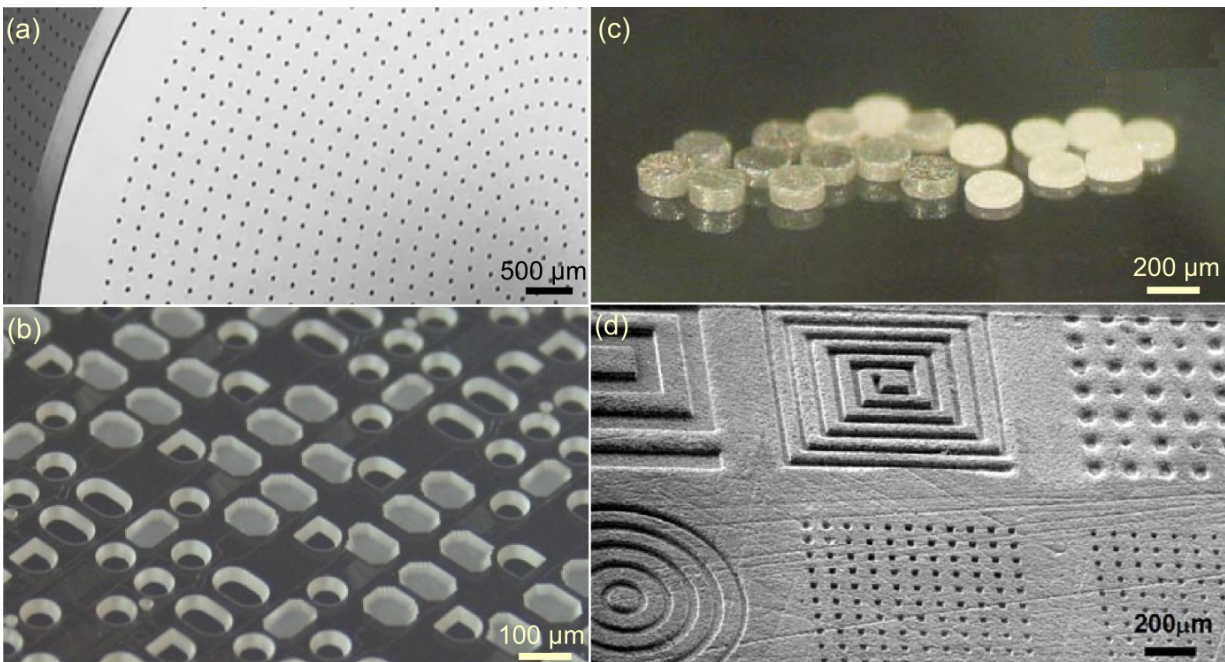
Machined features in ceramics and glass using conventional μ USM (a) Micromachined holes; (b) Slots and pockets [Son14a]; (c) PZT discs [Li09]; (d) Patterns with sizes ≥ 25 μ m machined on a Macor ceramic plate [Li06].
